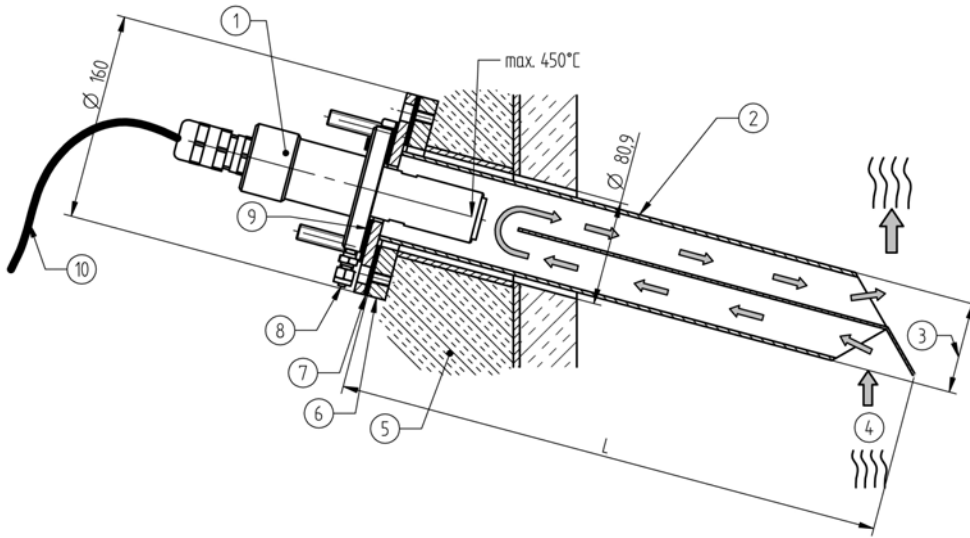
Dimensional drawing KS1D-Ex with flue gas bypass tube
